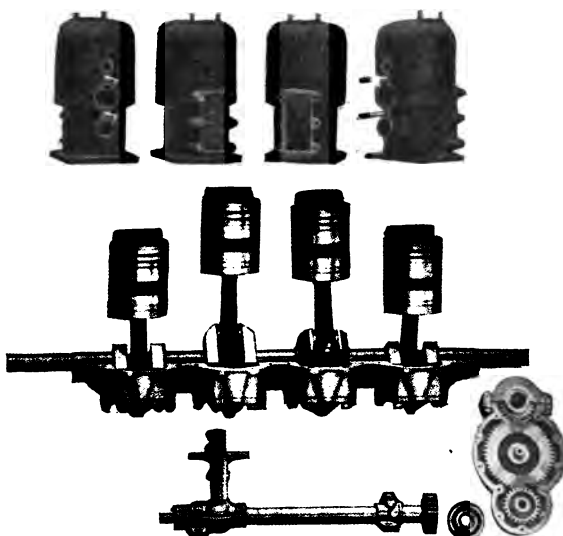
Working Parts of Elmore 4-Cylinder 2-Cycle Motor, Showing Small Number of Parts. Elmore Manufacturing Company, Clyde, Ohio.
